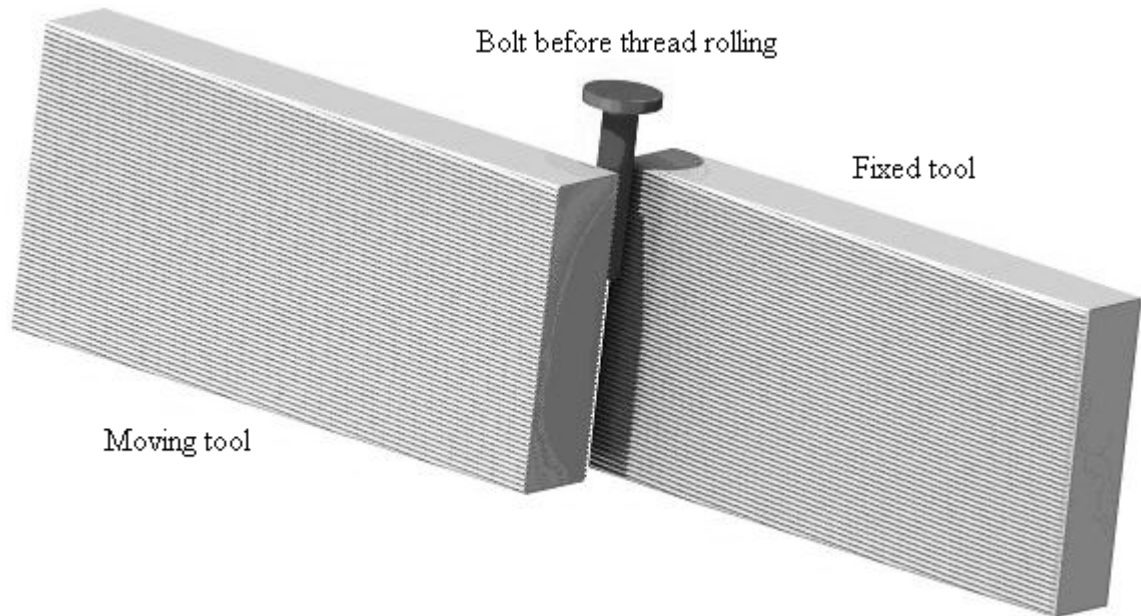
3D model of thread rolling tools with bolt before thread rolling
